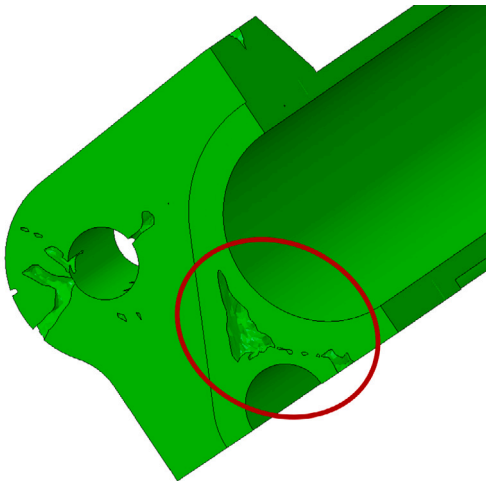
Optimized flange design with the removed material on the bottom side of the flange as a result of the topology optimization.
